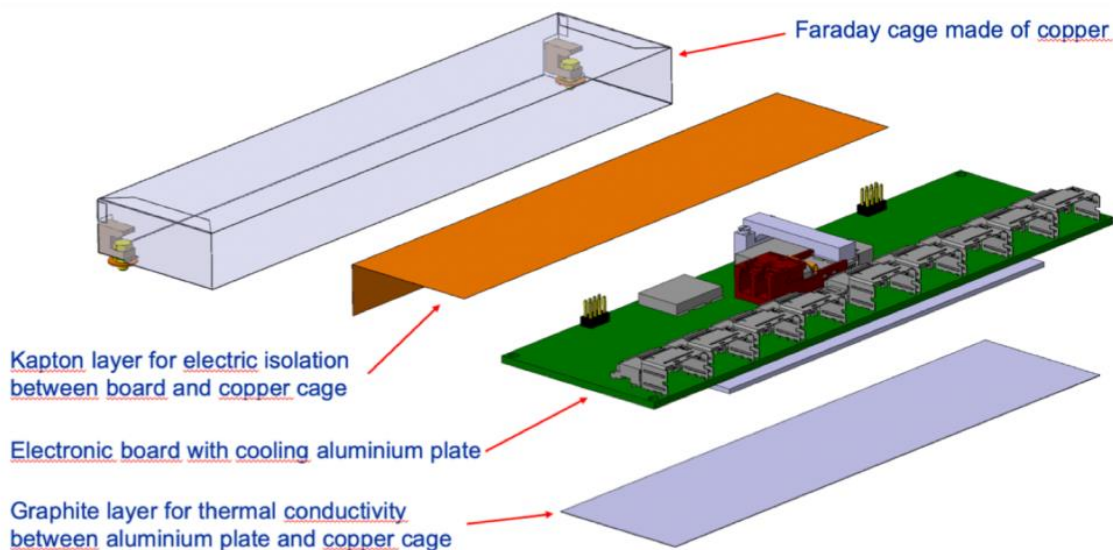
A 3D model of the Faraday cage assembly with the Kapton layer on top of the board and the graphite cooling pad at the bottom.
